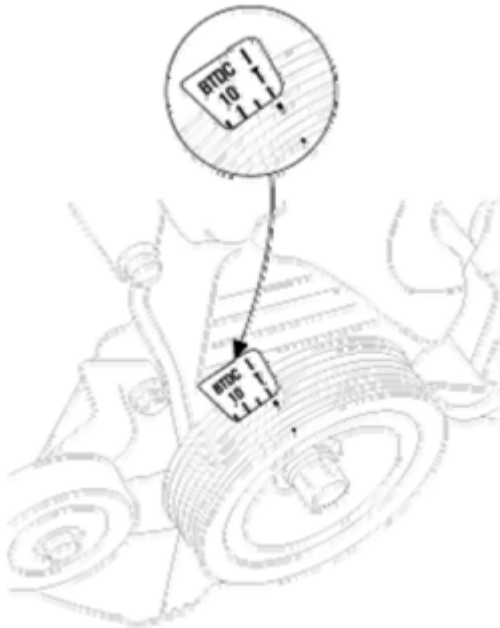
Aligning Crankshaft Pulley Groove With Timing Mark T Of Lower Timing Belt Cover
